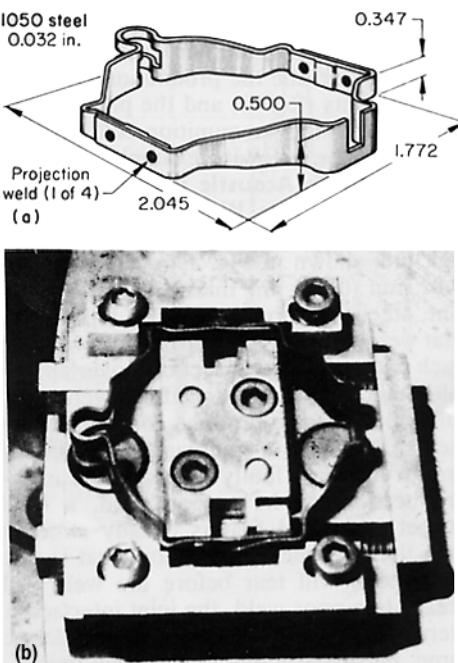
Ammunition-belt link, of 1050 steel, joined by four projection welds that were inspected by AE monitoring during proof testing in the fixture shown. Dimensions given in inches. Source: Ref 41
